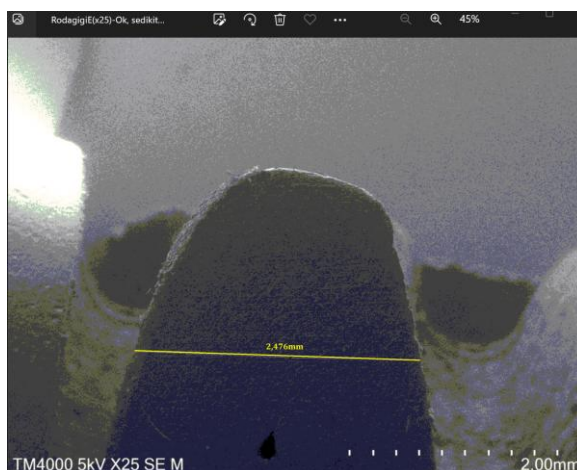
SEM photo for tooth thickness of the worm gear ring for Onyx+Carbon Fiber material with oil lubrication (E code)
